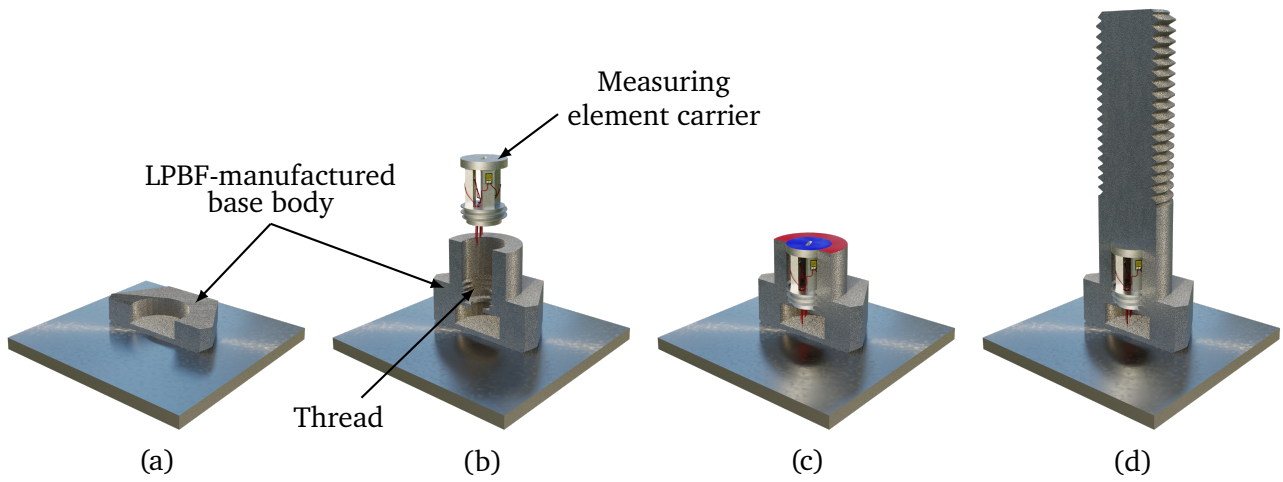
The disruptive manufacturing method is adapted to fabricate an LPBF-manufactured screw that enables a multi-axial force measurement. The required double-sided connection is achieved by an LPBF-manufactured thread on one side and a material connection created by LPBF on the other side. The graphic is taken from [206].
